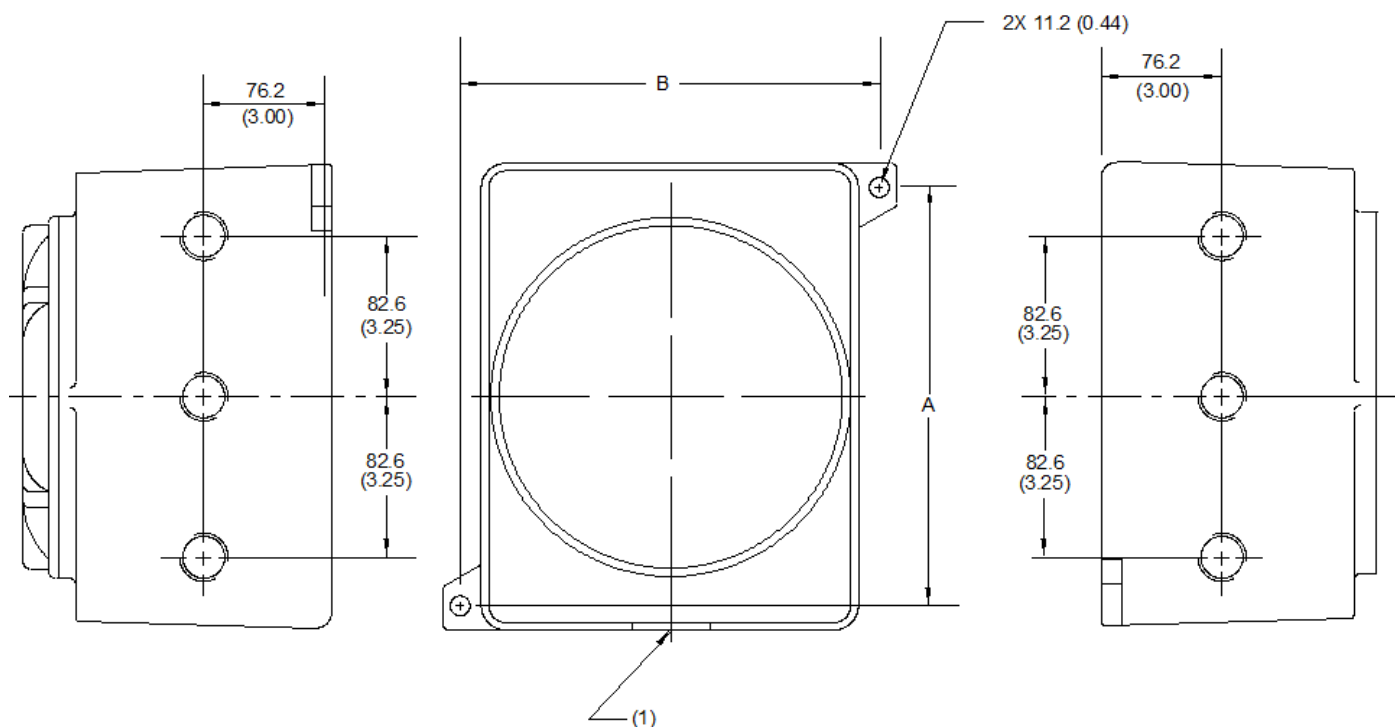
CA72342 4-Unit Explosion-Proof Housing Dimensions
